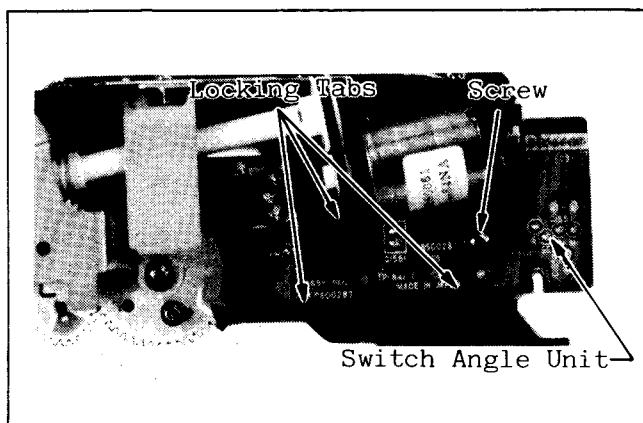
Adjustment of Cassette Up Gears-(6)
